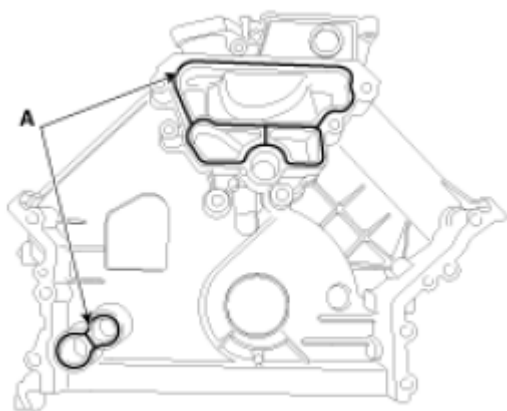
Identifying O-Ring Of Timing Chain Cover
